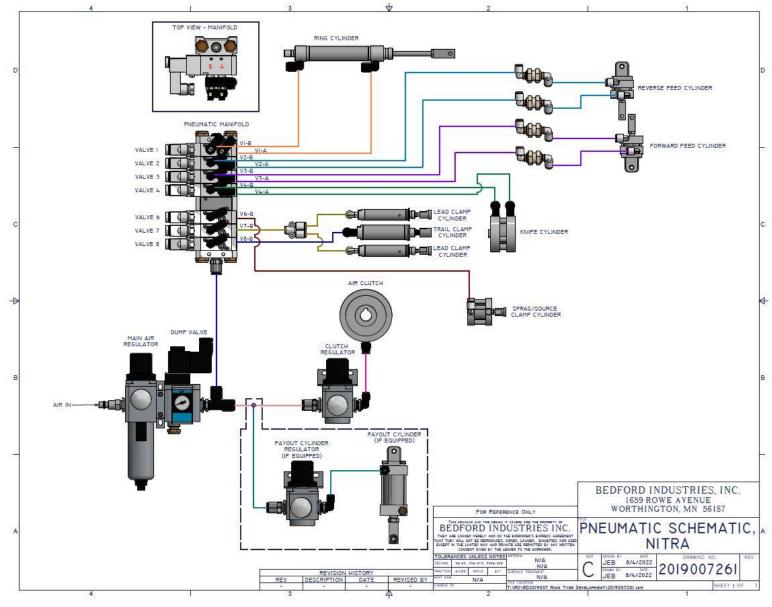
Pneumatic Schematic for Nitra Manifold
